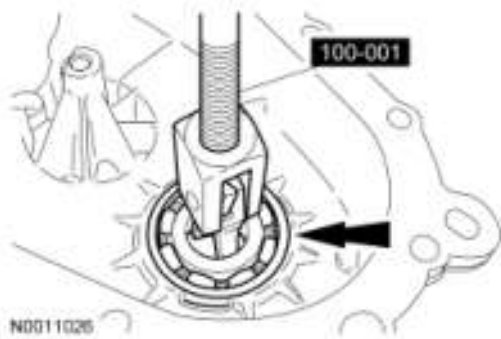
Locating Front Output Shaft Rear Bearing And Special Tool
